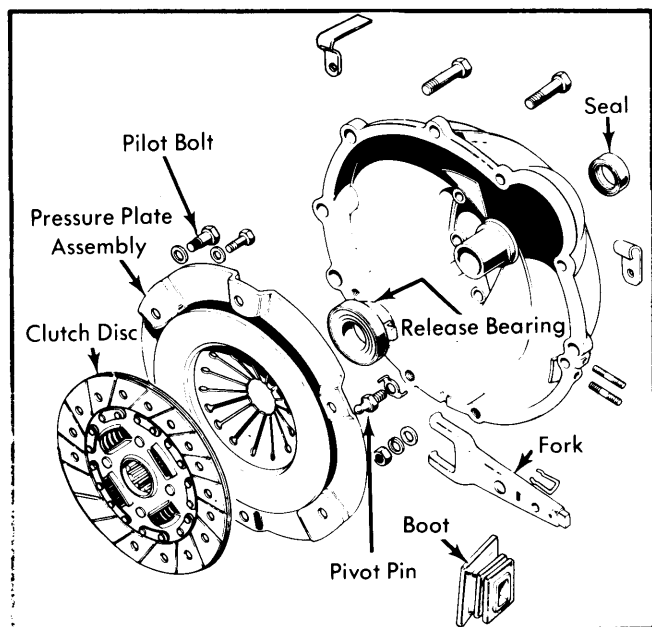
Exploded View of Clutch Assembly with Detail of Internal Components
